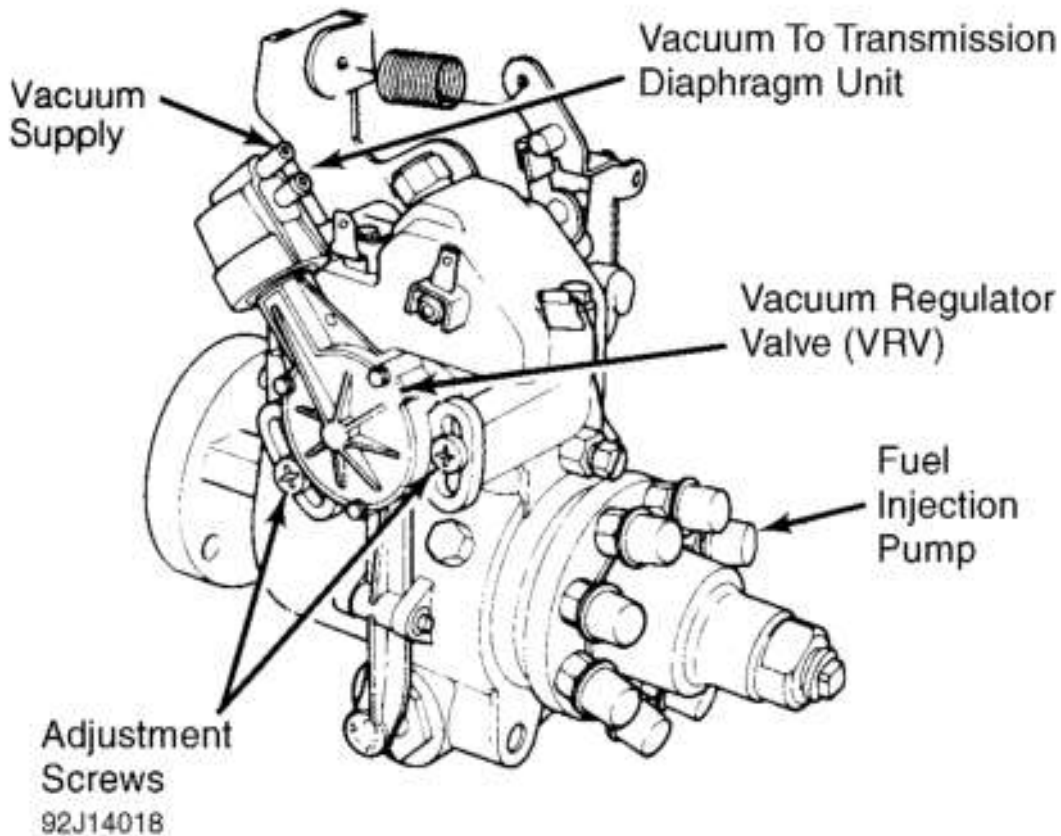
Vacuum Regulator Valve (7.3L Diesel)
